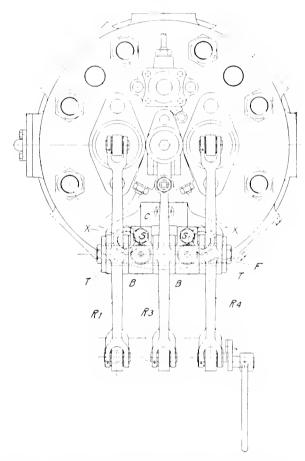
A Modified Arrangement of the Valve Gear to Facilitate Removal of Rocker Arms
